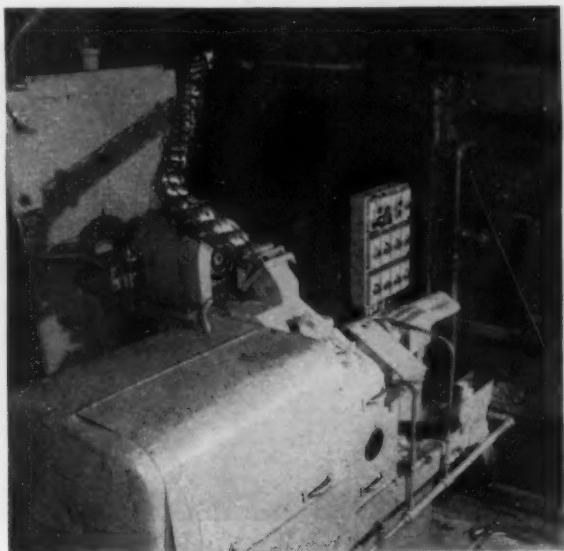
Wrist-pin holes are now bored on this single-spindle unit with automatic loading and unloading.
